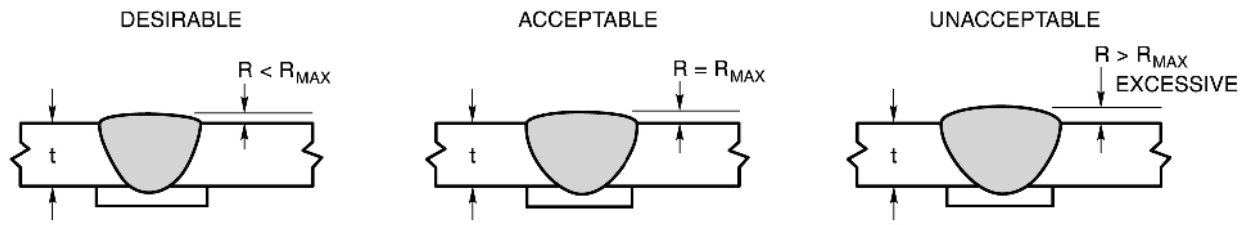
FIGURE A – WELD PROFILES FOR BUTT JOINT REQUIREMENTS (see Tables 2 and 3)
